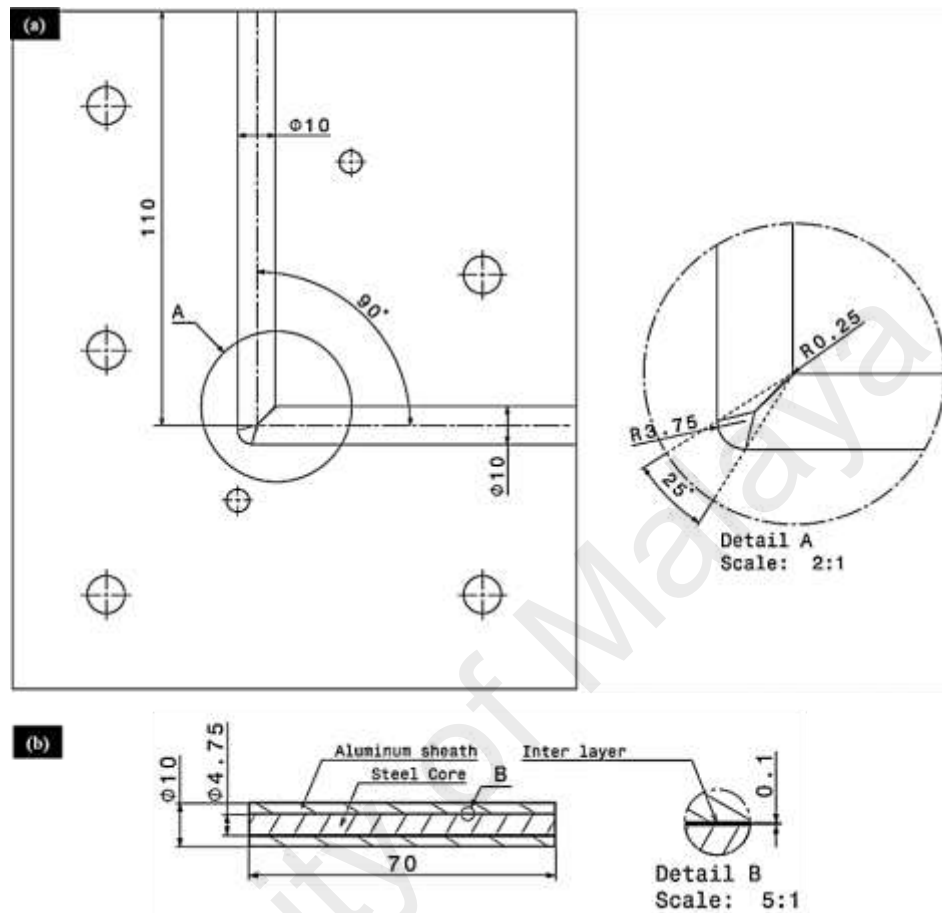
(a) ECAE die and (b) assembled workpiece including aluminum sheath, steel core and interlayer used in FE-modelling
